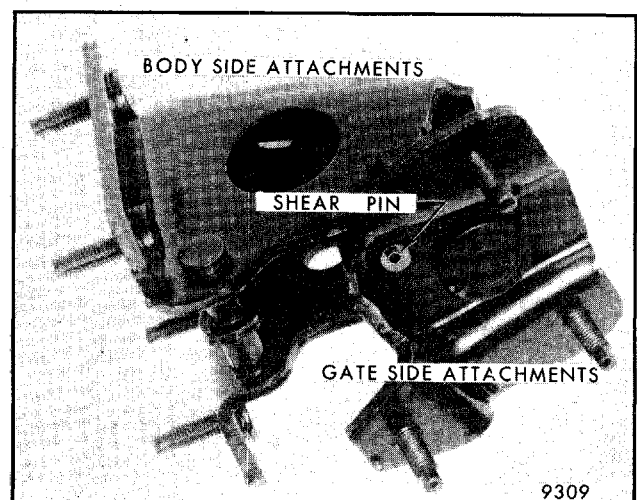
Tailgate Left Lower Hinge Assembly
